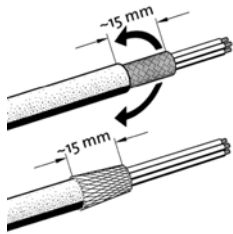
Connecting cable shields to the EMC threaded cable connections (SC...FC WM)
